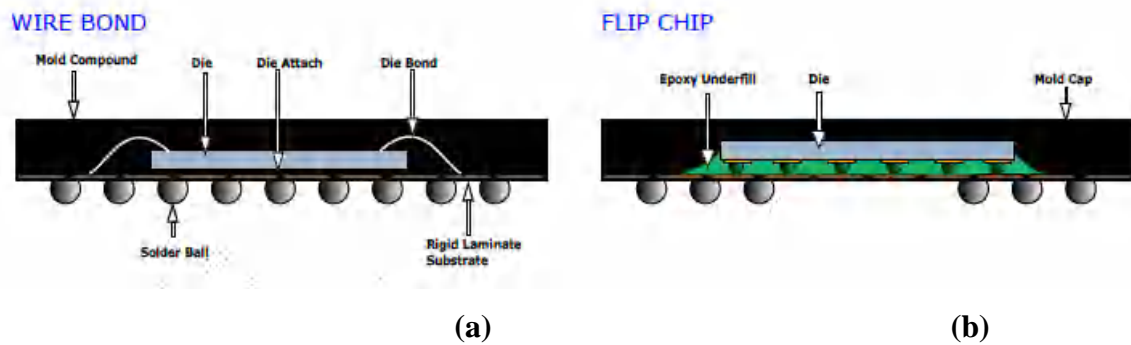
a) Wire bonding technic, b) flip-chip technic
